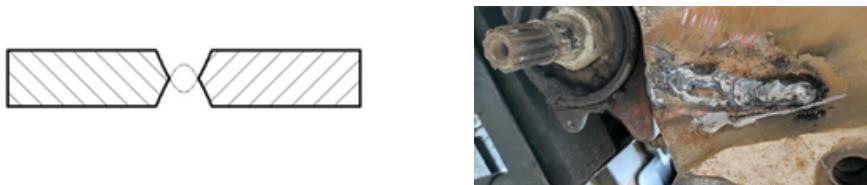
a) Weld Groove Cross-Section b) Weld Groove
